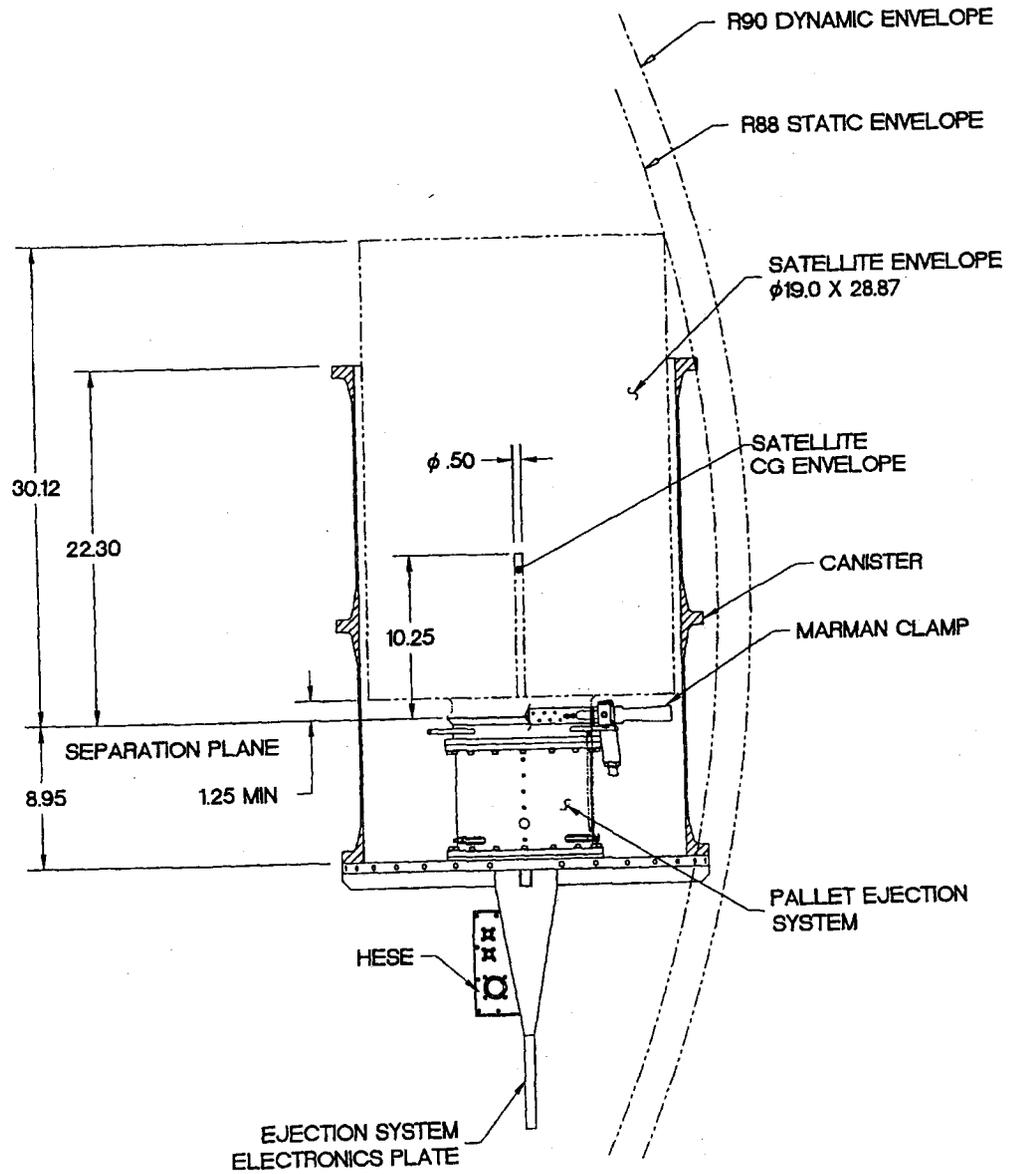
PALLET EJECTION SYSTEM WITH OPEN CANISTER
